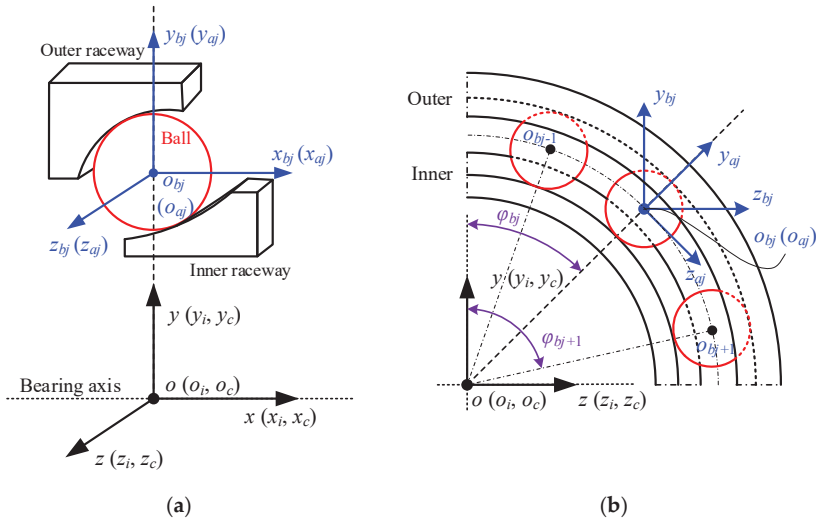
Bearing coordinate frames: (a) axial section; (b) radial section.
